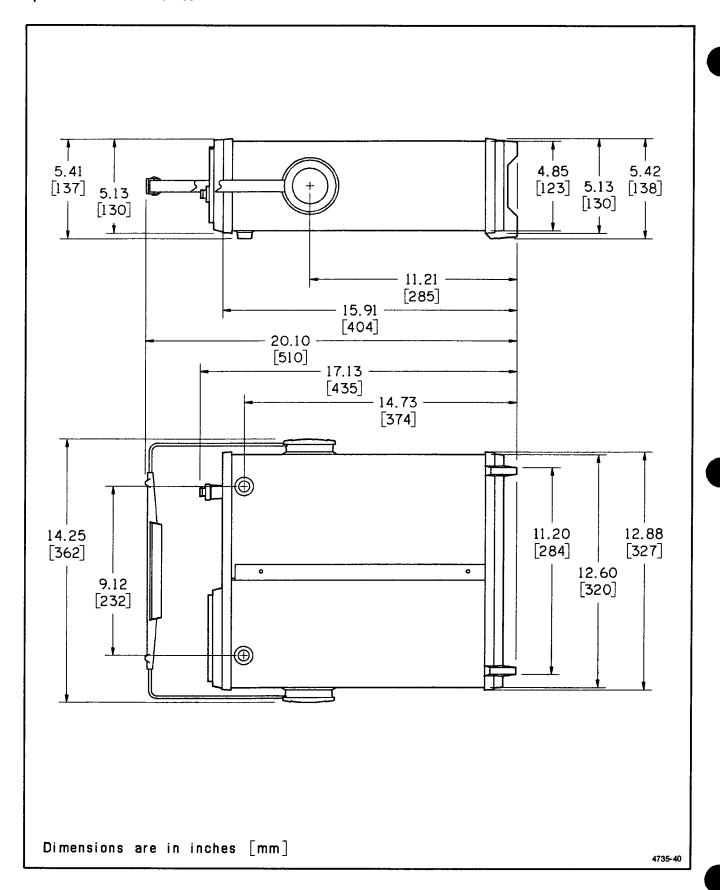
Physical dimensions of the 2213A Oscilloscope.
